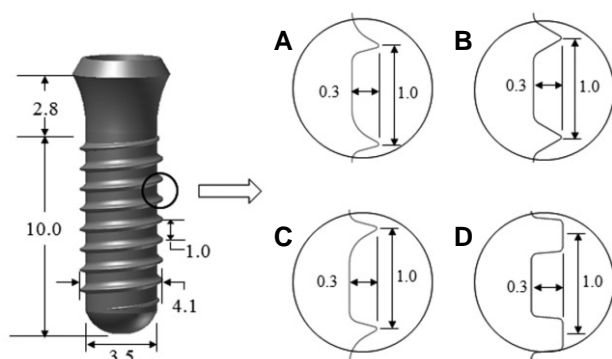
Dimensions of a cylinder shaped implant body and the four different threads incorporated into the implant: (A) buttress, (B) V-shaped, (C) reverse buttress, and (D) square shaped threads (unit: mm).
